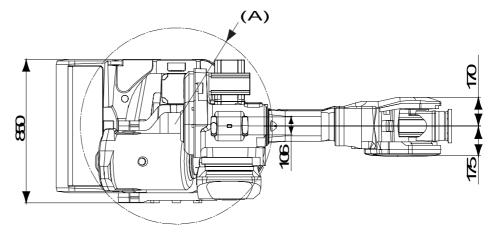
Holes for mounting of extra load on the upper arm on IRB 6600/6650 (dimensions in mm).
